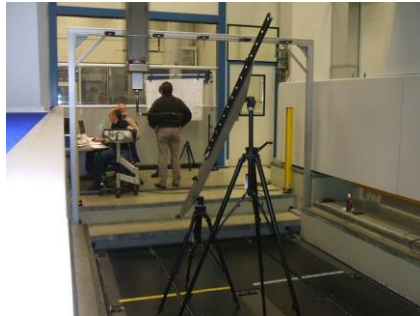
Giant ball bar (Source: Trapet Precision Engineering)
